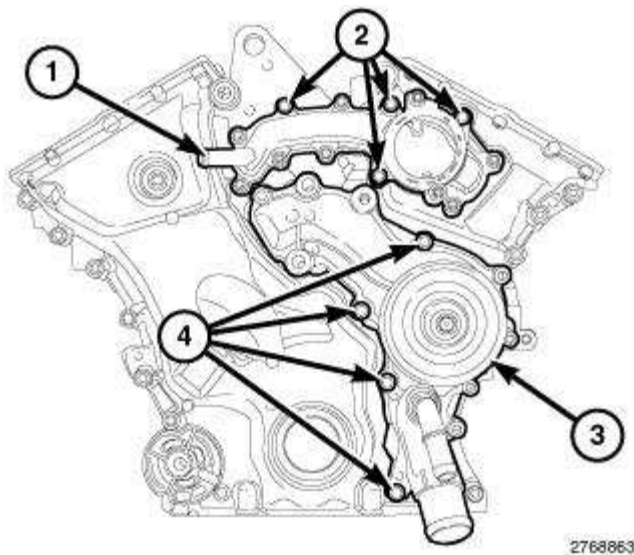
Coolant Outlet Housing, Water Pump & Bolts
